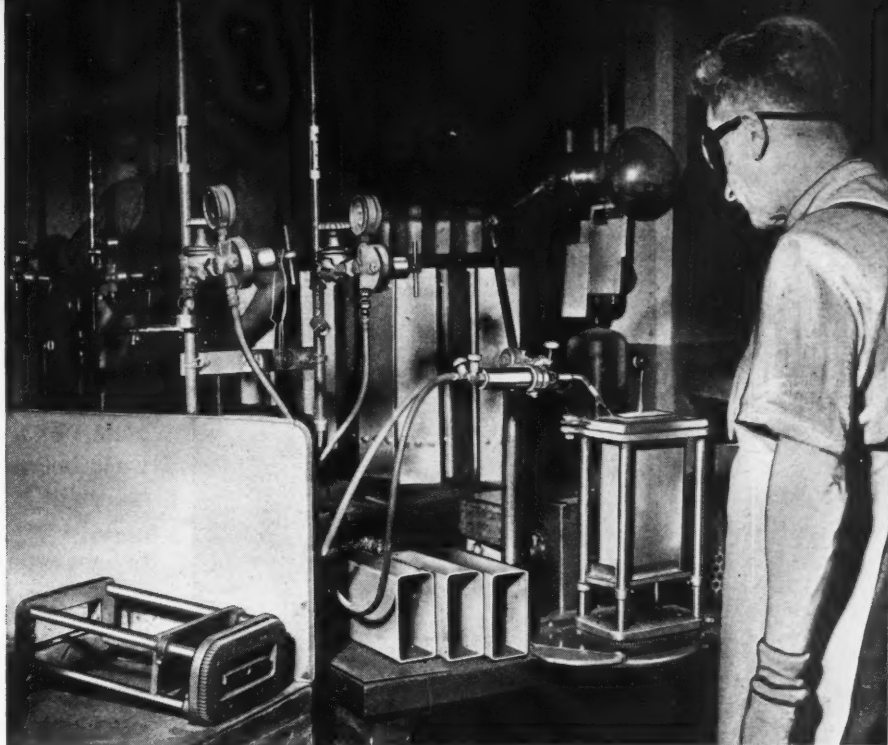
In welding bottoms to cell containers, a special work-positioning fixture is used to carry all four sides and the corner radii under a stationary welding head
